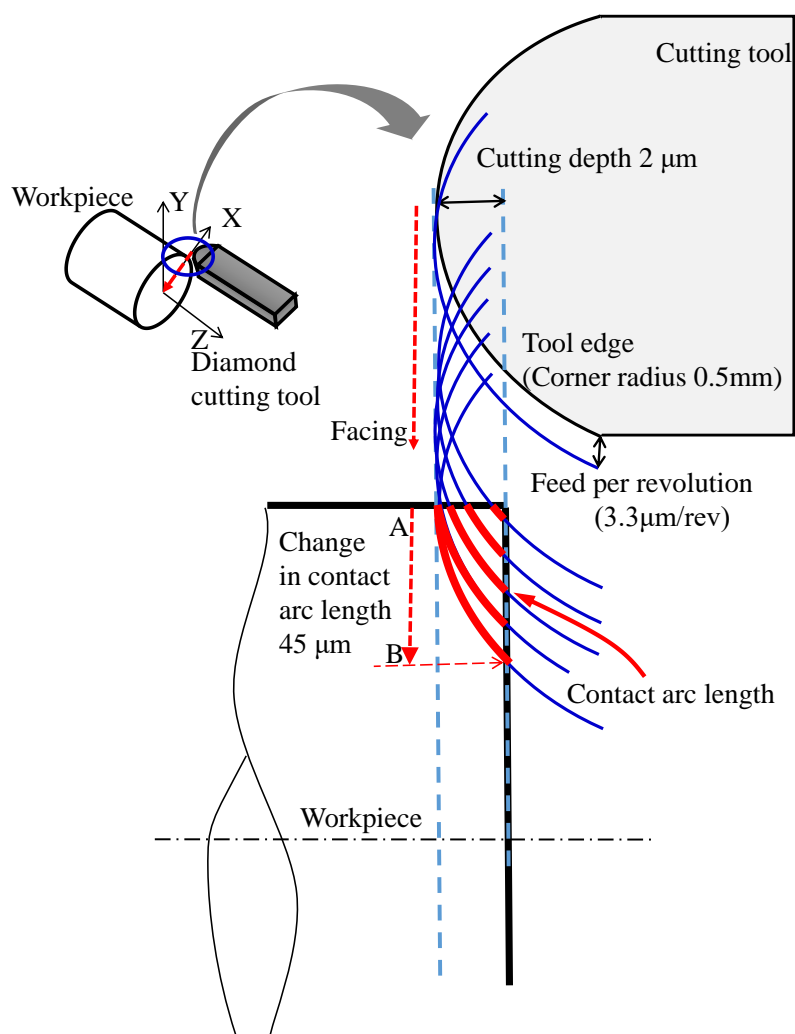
Changes in contact area between tool cutting edge and workpiece during cutting operation.
